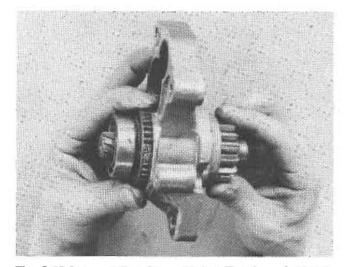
Inspect Bearings, Pinion Teeth and Clutch
